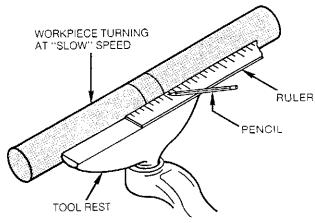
With a pencil, scribe lines on the revolving stock to indicate where you want the beads, coves, and other parts of your spindle design to begin and end.
